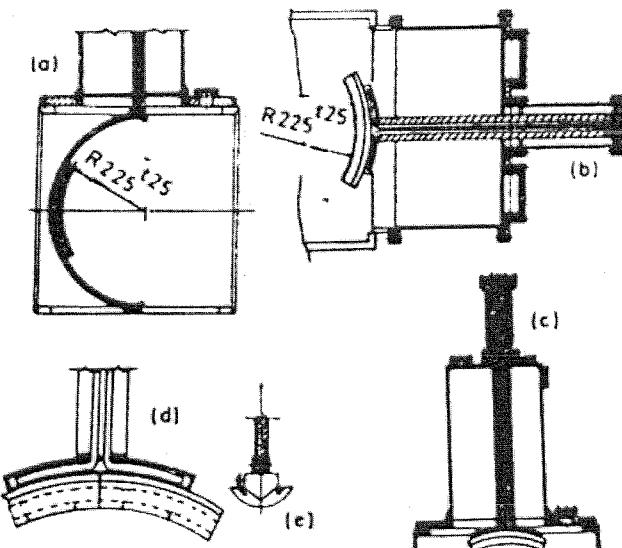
Details of the movable limiters - (a) inner; (b) outer; (c) top/bottom; (d) & (e) toroidal and cross-sectional view of the carbon tiles mounted on the limiter holder
